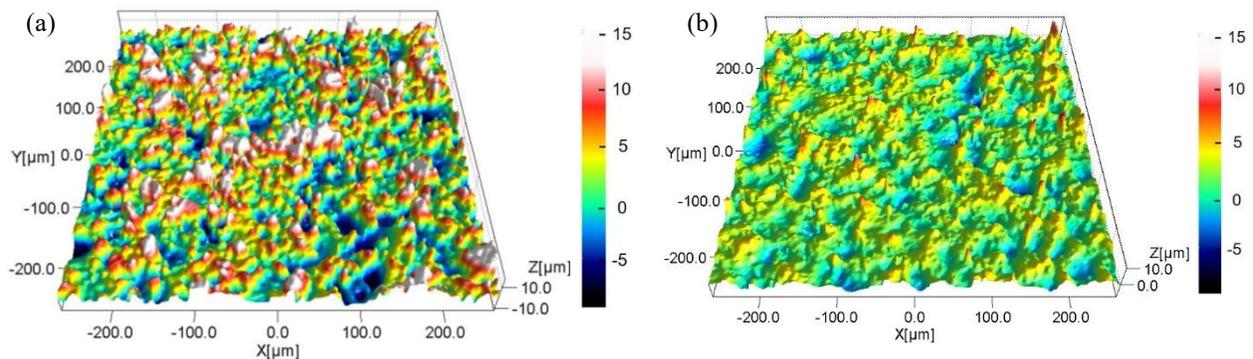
3D surface morphology of Inconel 718 machined with hard zinc coated brass electrode at
